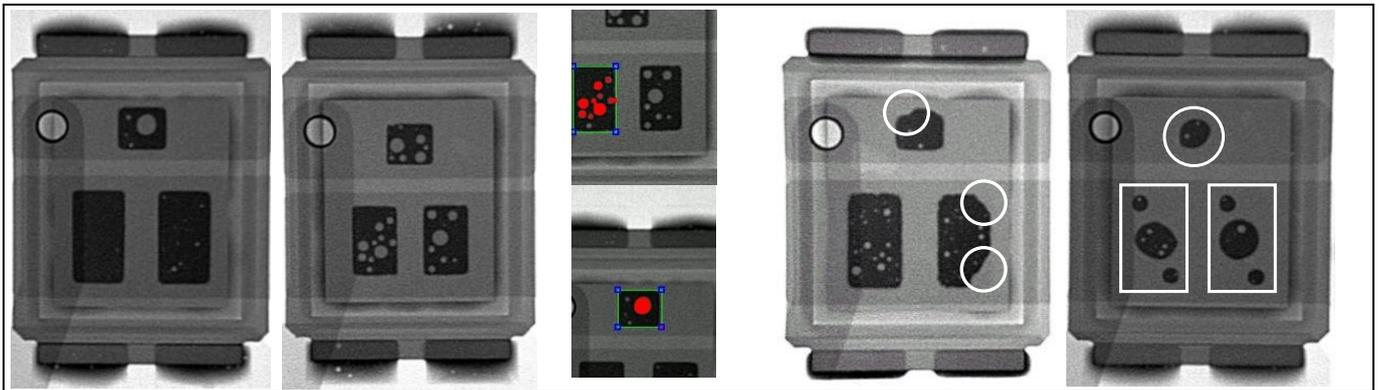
Examples with solder joint voiding (left) and poorly formed joints (right)
